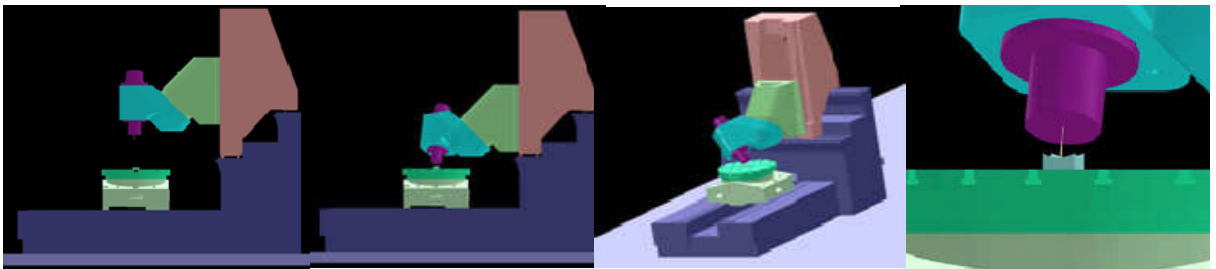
Motion simulation for a five-axis virtual machine tool milling a workpiece with free surface: (a) The virtual machine tool stops, to establish machine origin, (b) The virtual machine tool begins to mill the workpiece, (c) Full view of milling process, (d) Close-up view of workpiece milling.
